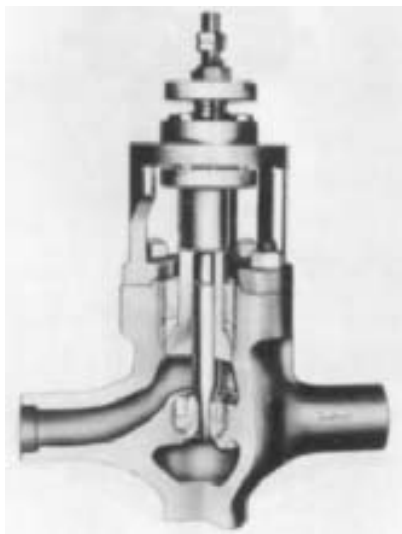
This control valve is basically a globe type, with reduced trim and guided tapered plug (Copes-Vulcan).
